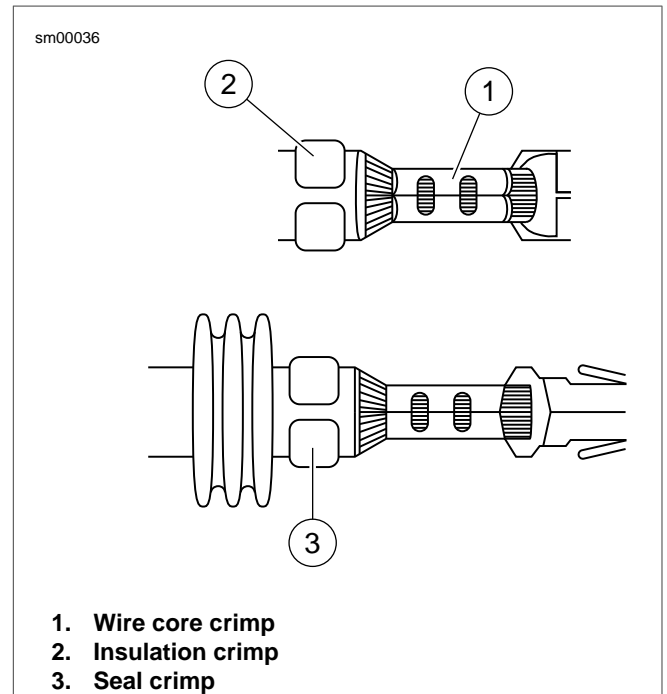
Metri-Pack Connector: Inspect Core and Insulation/Seal Crimps
